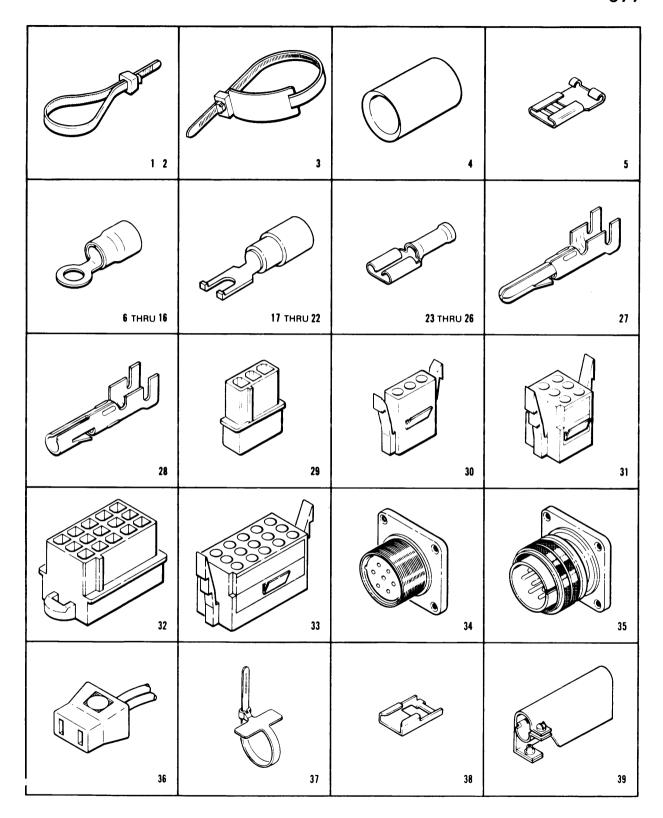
HARNESS AND CABLE COMPONENT ASM (SHEET 1 OF 2)
